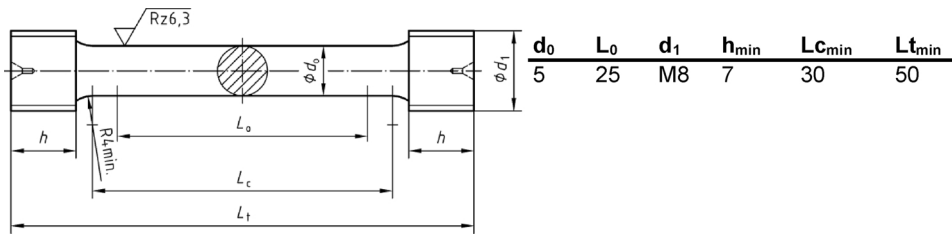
Geometry and dimensions of used tensile specimen [19].
